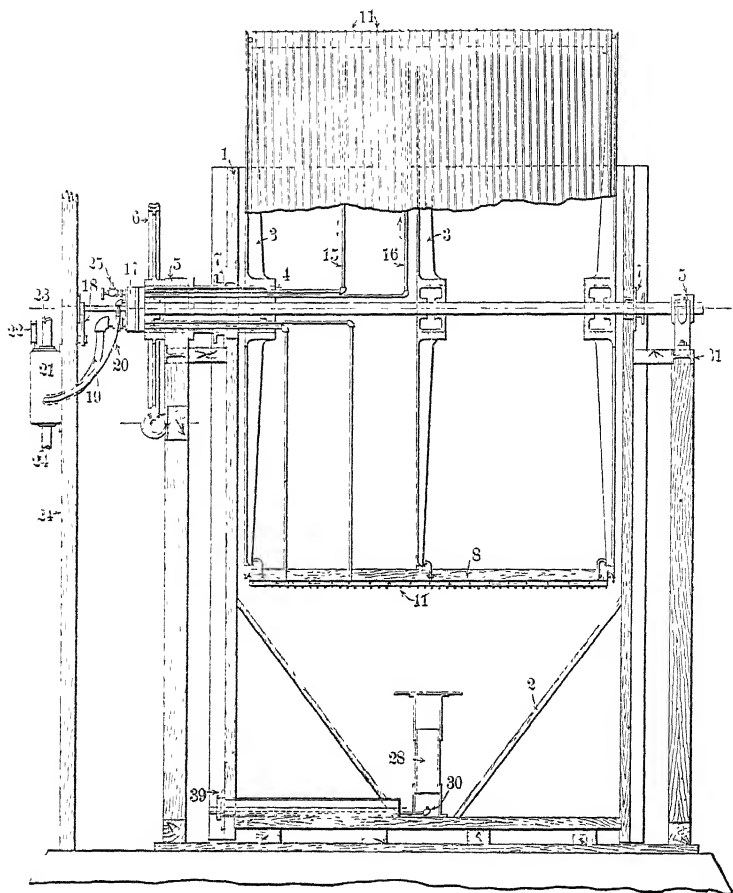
OLIVER CONTINUOUS FILTER. TRANSVERSE SECTION AND ELEVATION.
